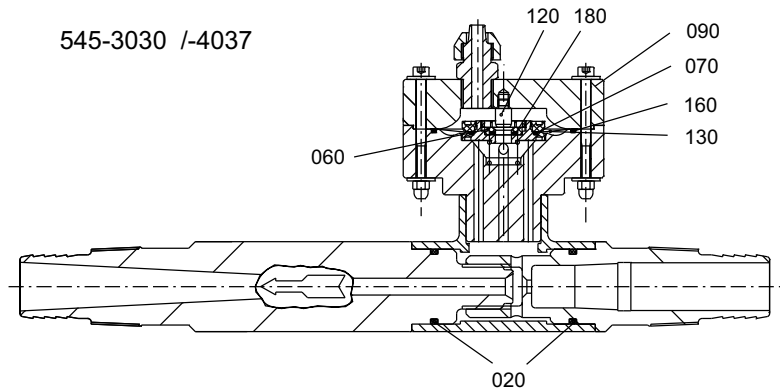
Assembly diagram, 545-3030/-4037 injectors
